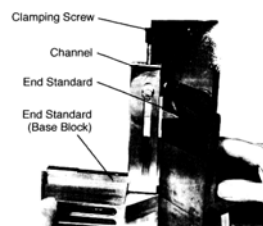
This basic holder can be used for a wide range of setups by changing the end standards.
